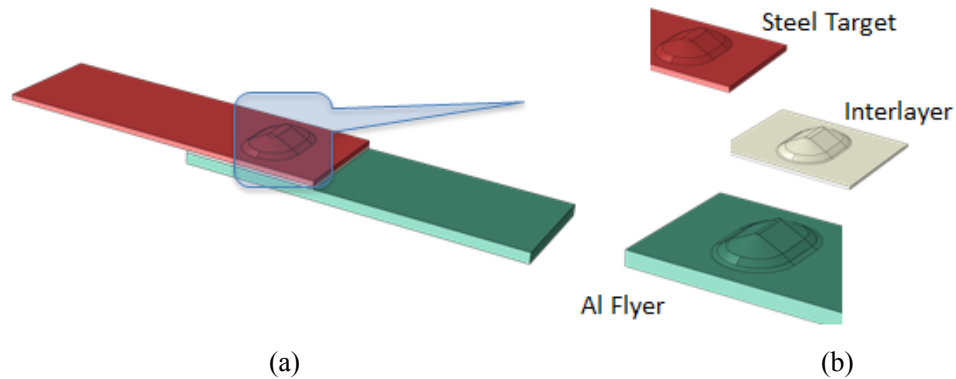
F.3. Model for the lap shear test configuration of the joint showing (a) the assembled lap shear configuration and (b) the exploded view of the weld assembly showing the Al flyer, the interlayer, and the steel target. Source: OSU.
